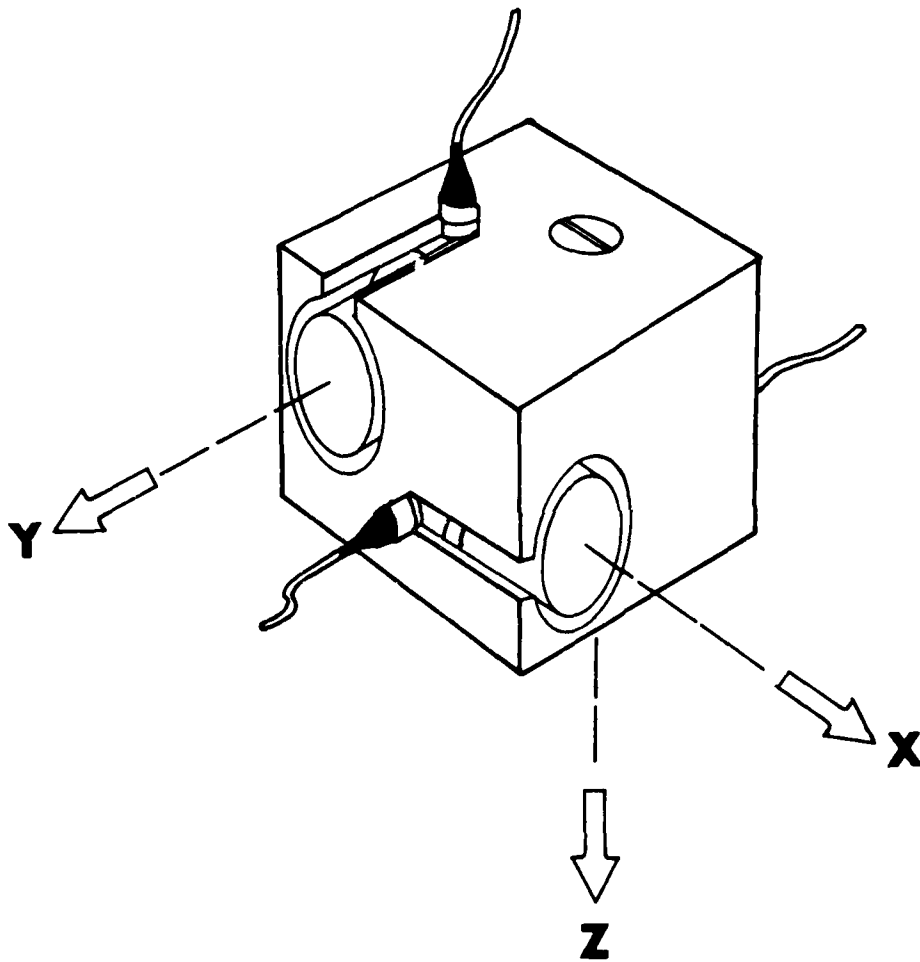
Isometric View of 3-D Accelerometer Package
